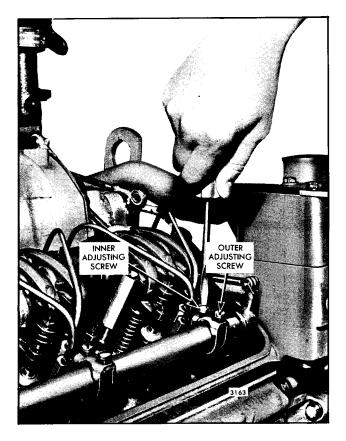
Adjusting Injector Rack Control Lever Adjusting Screws
